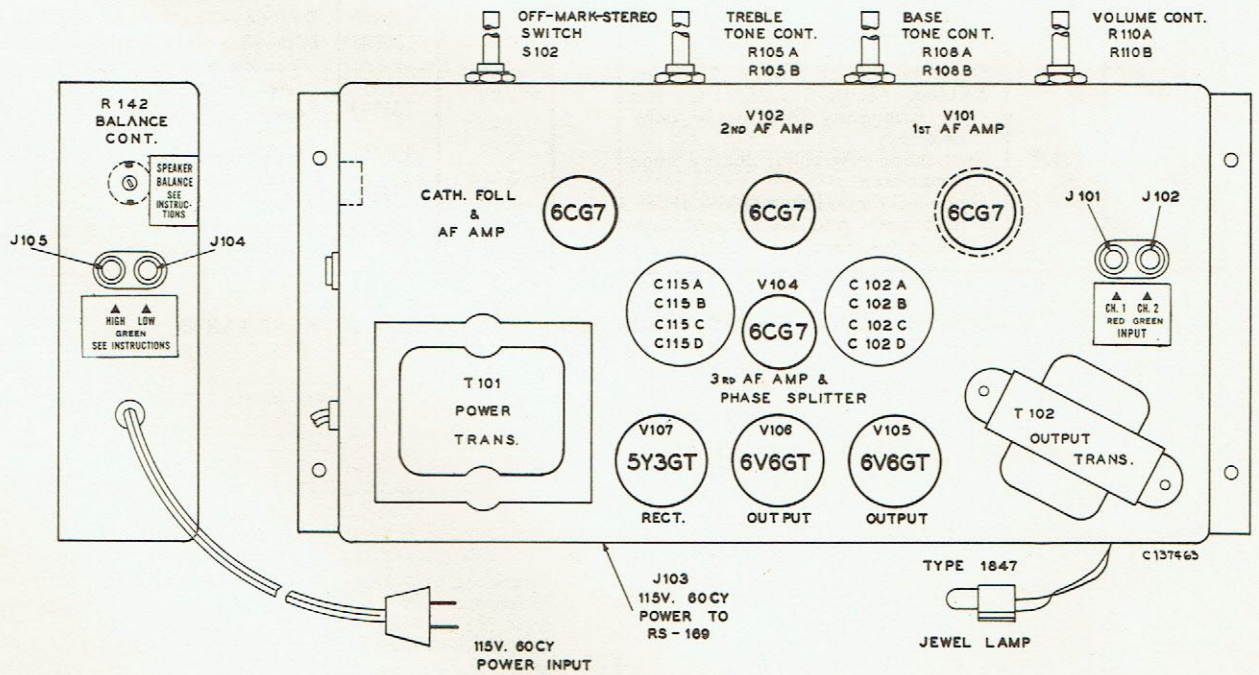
Power Amplifier Assembly, Chassis No. RS-169
